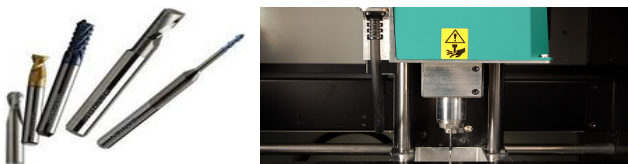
The method used in operation by milling and machining head and to the left of the milling tools.
